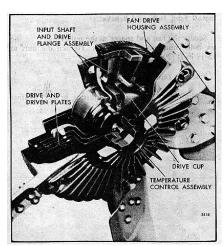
Typical Thermo-Modulated Fan Drive Assembly
